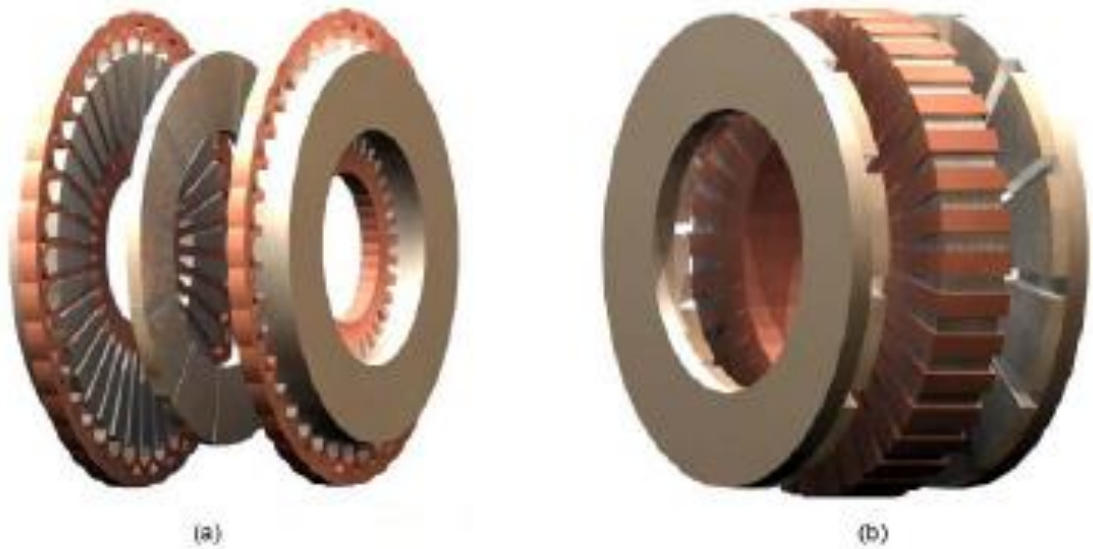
(a) Double Stator Single Rotor AFM, (b) Double Rotor Single Stator AFM. [83].
